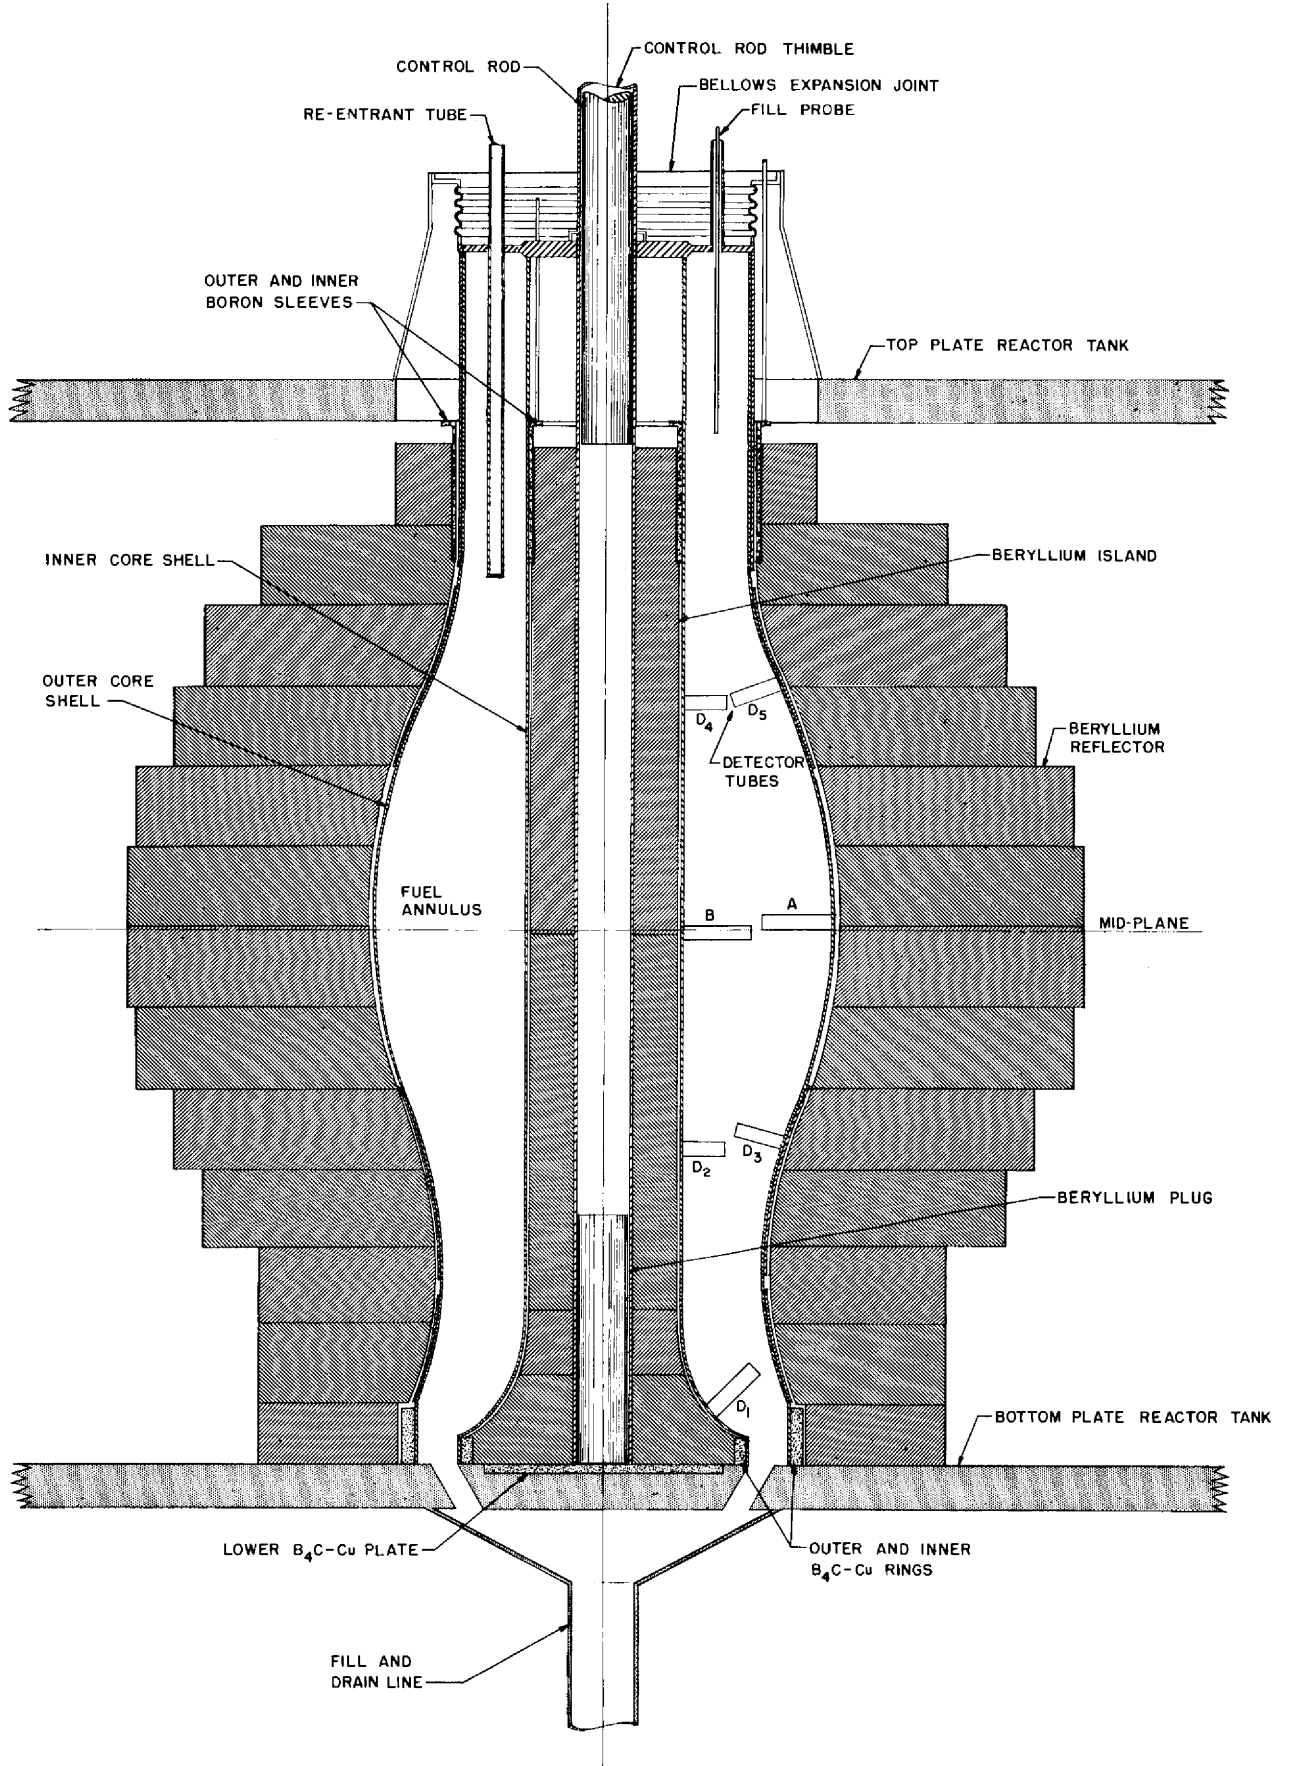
REACTOR ASSEMBLY - MAJOR COMPONENTS
